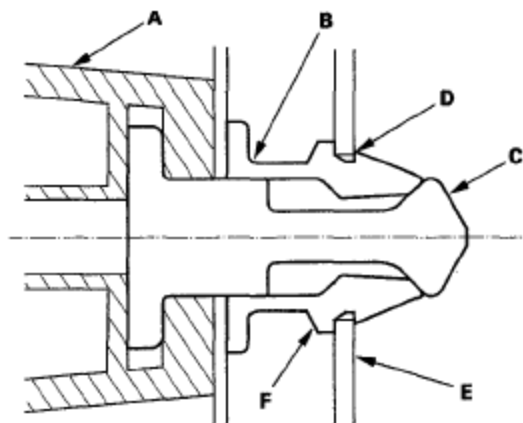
Identifying A-Pillar Trim, Resin Grommet, Metal Pin And Groove
